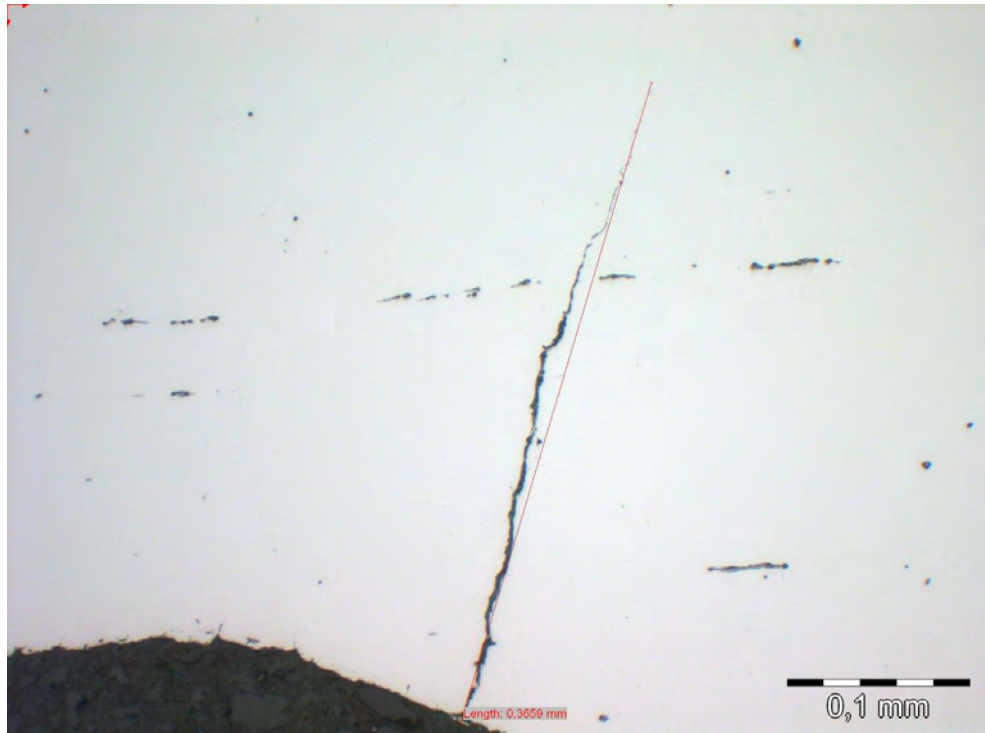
Crack at segment B, third ridge on barrel no. SFK 0123-A
